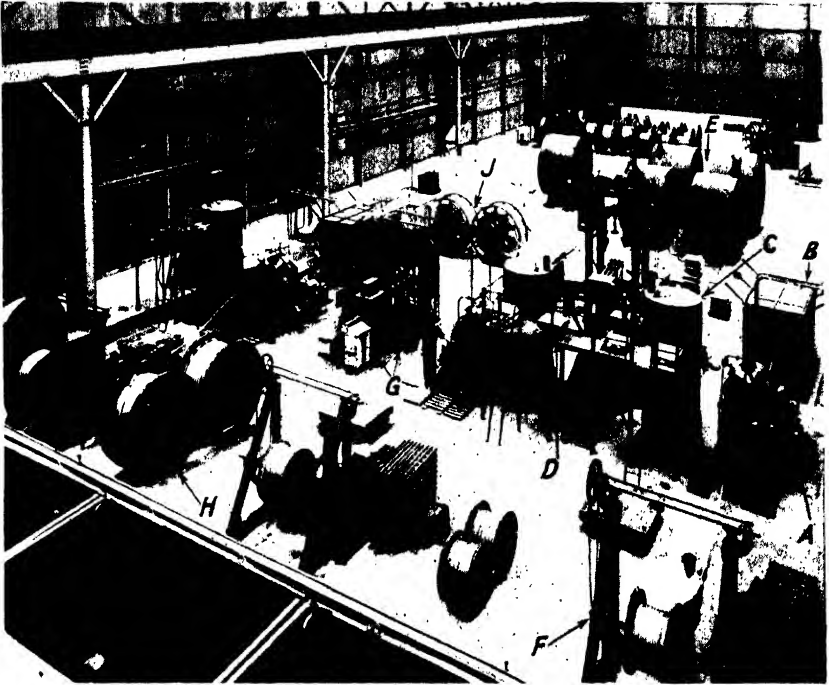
Layout of Pirelli continuous extrusion shop.
